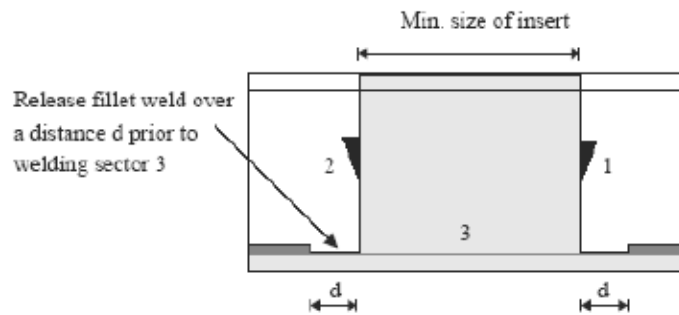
Welding sequence for inserts of stiffeners
